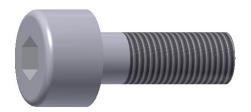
Cylindrical head screw with hexagonal hole (3D).
